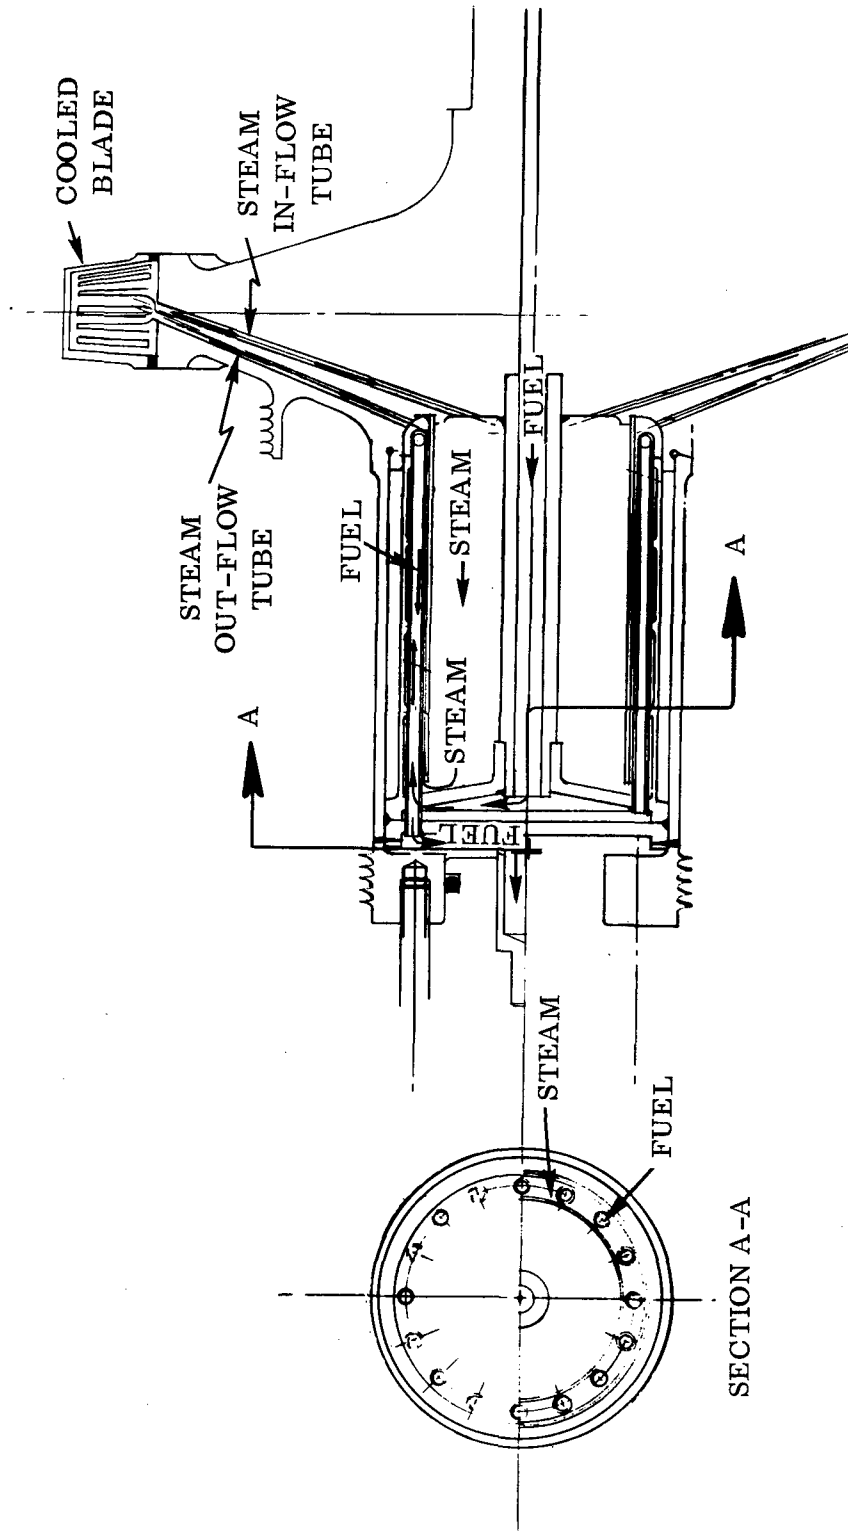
Cast-Cored Wheel With Heat Exchanger in Engine Shaft.
